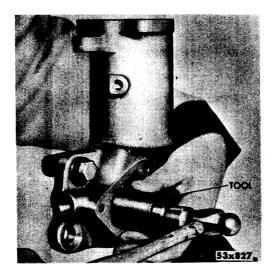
Removing Steering Gear Housing Shaft Needle Bearing (Tool C-3333)
